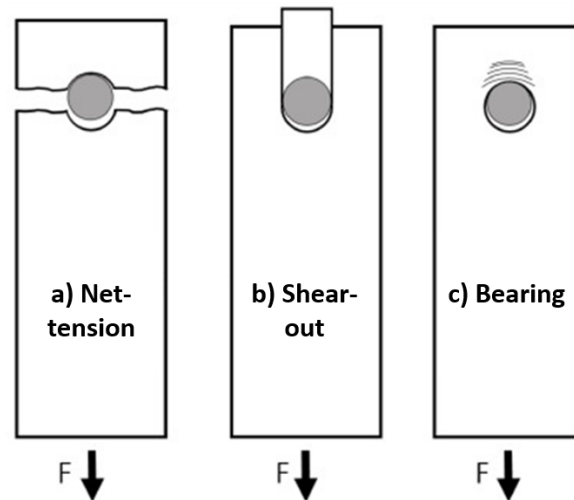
The typical failure modes for bolted composite under tension. a) net-tension failure, (b) shear-out failure, (c) bearing failure. Modified with permission from [38].
